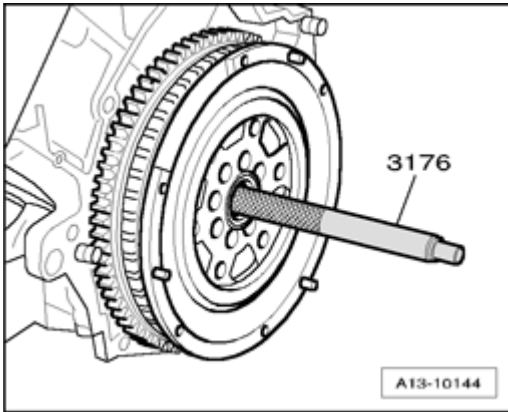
Using Backside Of Centering Mandrel 3176 To Press Needle Bearing Further In Until Previously Measured Depth Is Achieved
